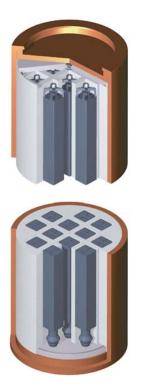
Copper canister with cast iron insert for BWR fuel /SKB 1999a, Figure 5-4/.
